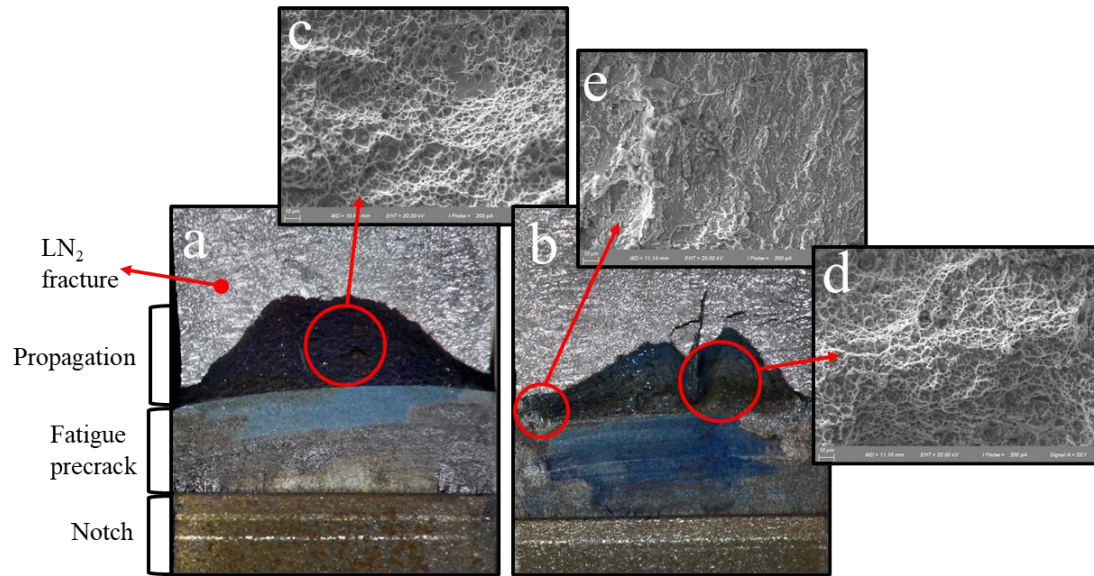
(a) FZ1 air tested sample fracture surface; (b) FZ3 H tested sample fracture surface; (c) dimples in FZ1 sample; (d) dimples in FZ3 sample; (e) embrittled edge in FZ3 sample.
